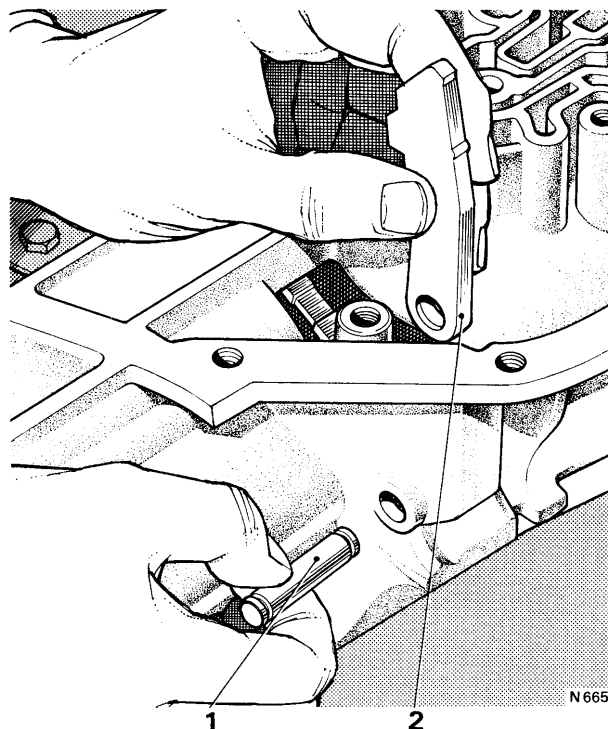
FITTING THE PARKING PAWL AND SHAFT
